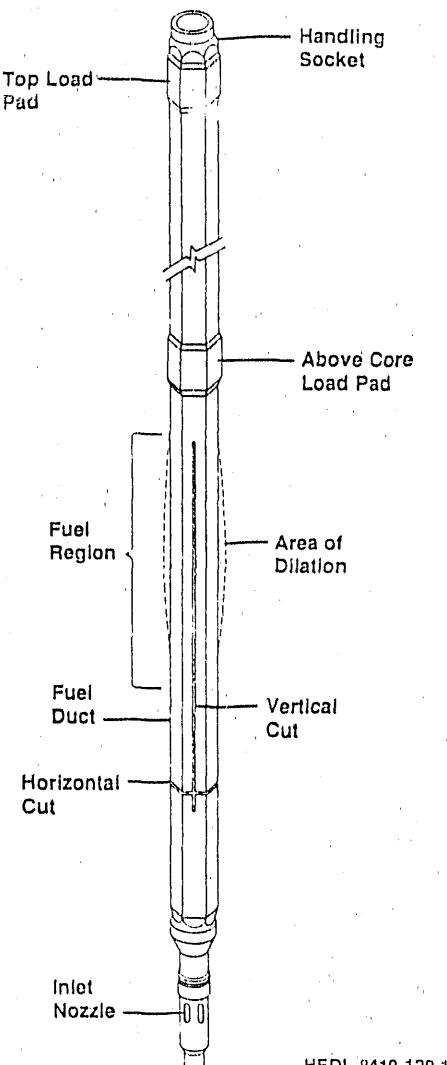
FFTF Fuel Assembly Illustrated With Horizontal and Vertical Cuts.
